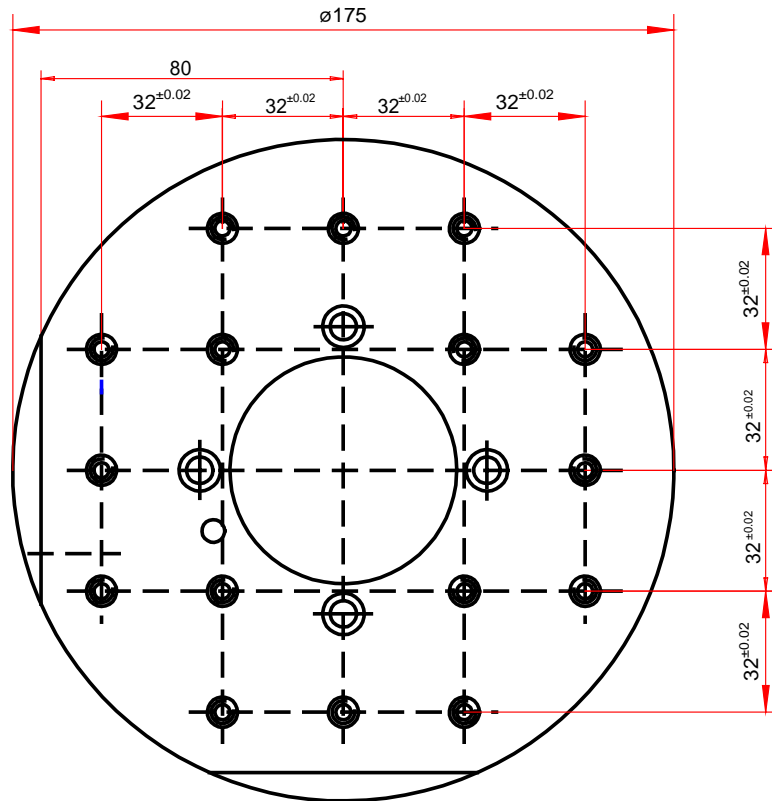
Detail of one of the 32 x 32 grid of threaded holes. Thin-walled \varnothing_a 8mm tubes, protruding a few mm into the flange may be used to accurately position instrument interfaces on the flange.
